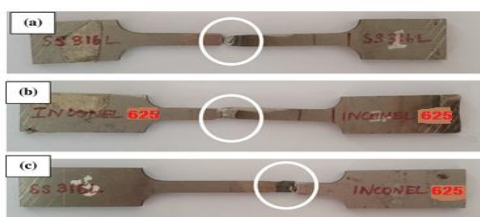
Tensile fracture photograph of the weldments (a) SS316L similar joints (b) Inconel 625 similar joints (C) SS316L and Inconel 625 dissimilar joints.
